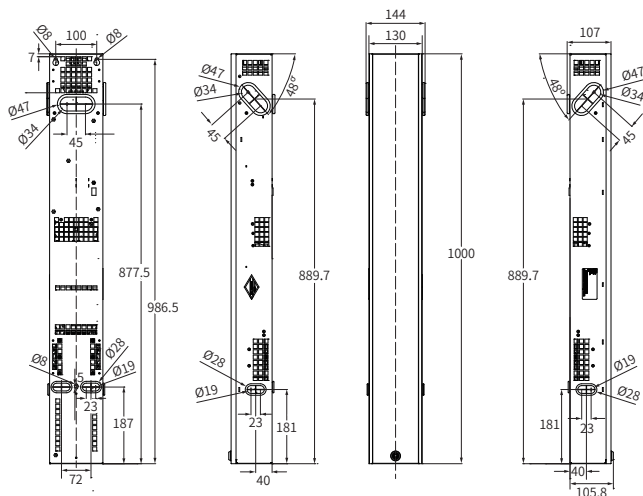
Mounting dimensions of the control cabinet (unit: mm)
